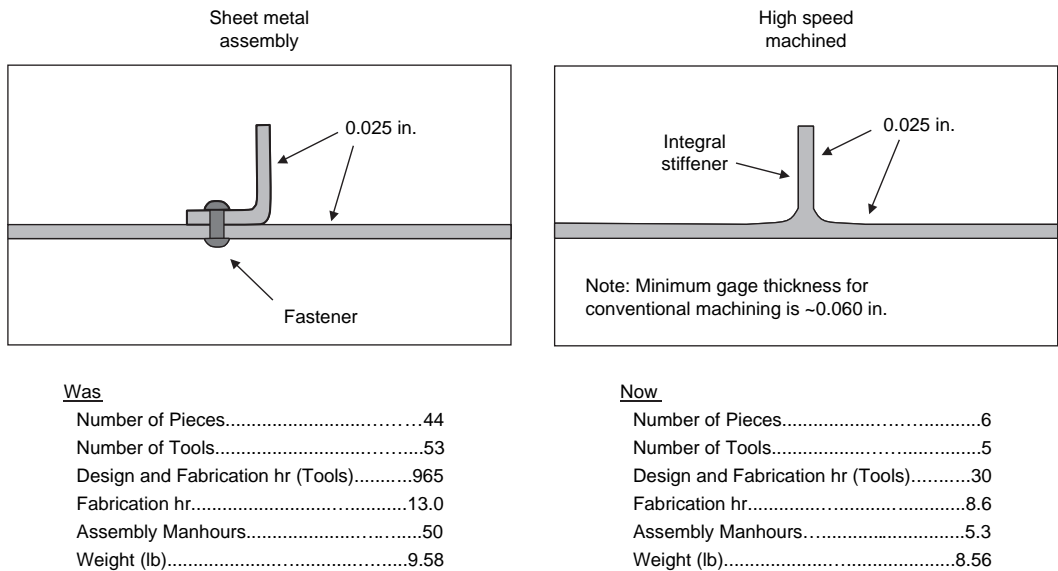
Comparison between assembled and high-speed machined assembly
